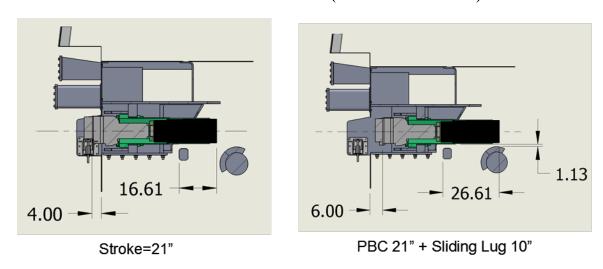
Side view illustration of coupler push-back and resulting clearance with the axle cover/traction motor bracket (dimensions in inches)
